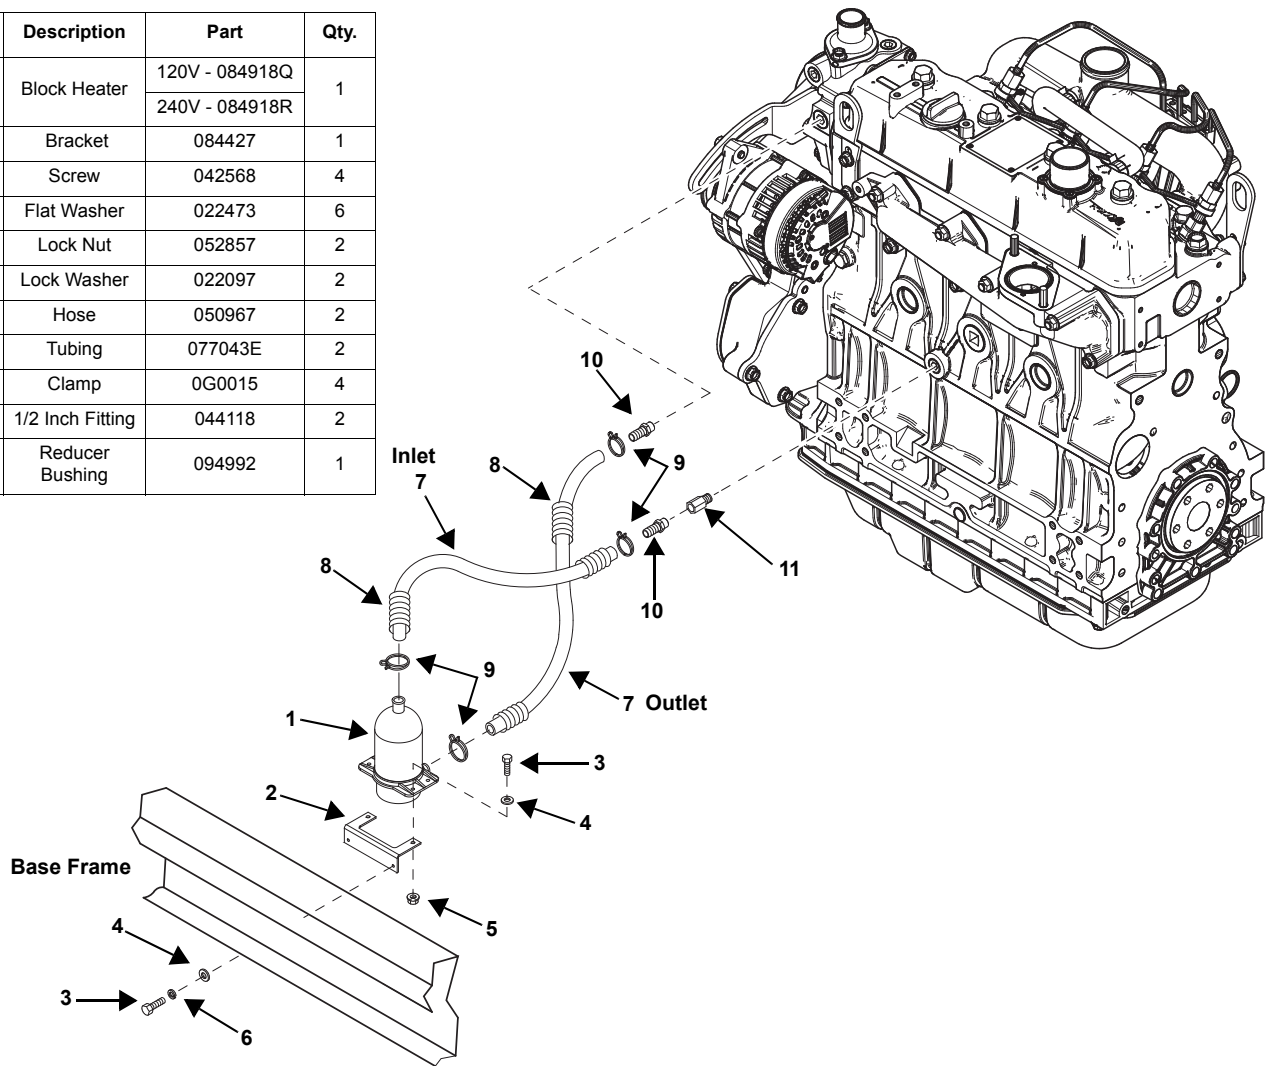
Block Heater Assembly (Exploded View—2.3L Models)
